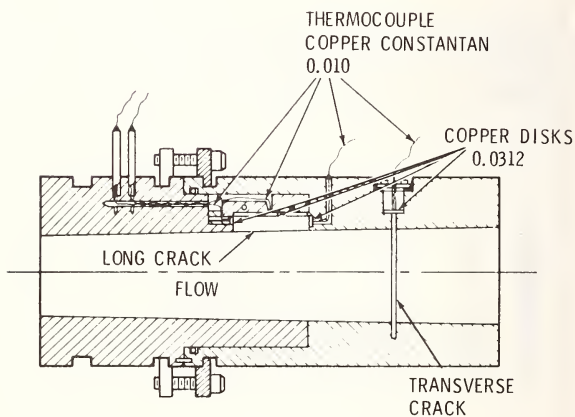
HEAT GAUGE INSTALLATION IN CRACK
